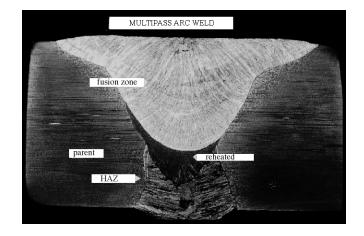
A multipass arc weld illustrating the heterogeneous microstructure. The plate is about 20 mm thick. Photograph courtesy of L.–E. Svensson.
